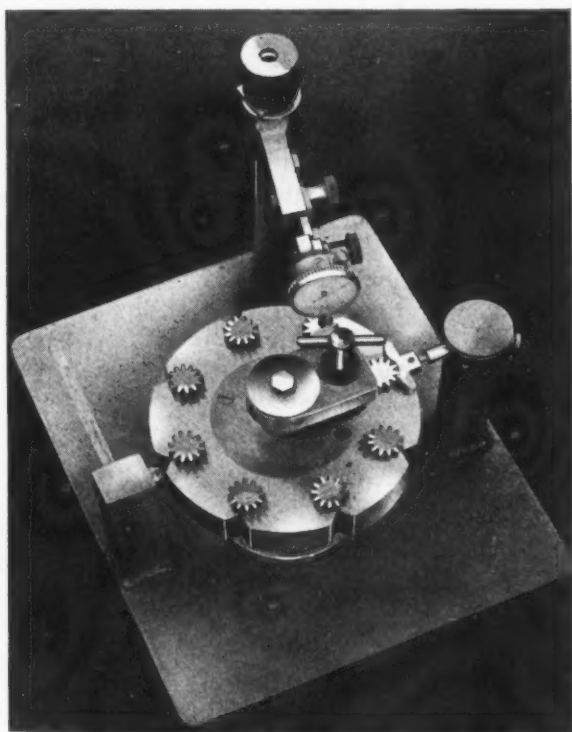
Gage Designed for Checking Outside Diameter, Thickness, and Concentricity of Pump Gears
